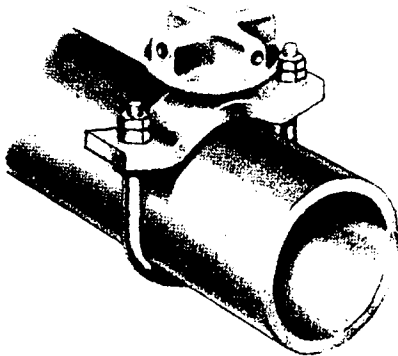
SPARGER SADDLE MOUNTED ON HEADER
